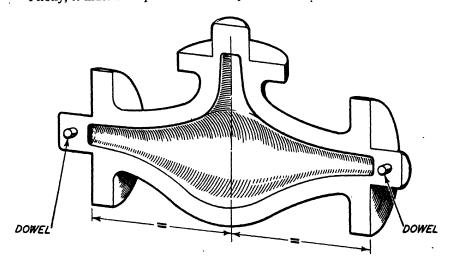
One half of a "hollowed-out" valve body pattern Showing how joint face is also relieved for even seating.
